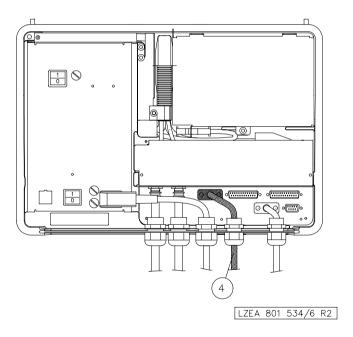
Connection of FE telephone line connection cable, TSRA 905 45 (Pos 4).
